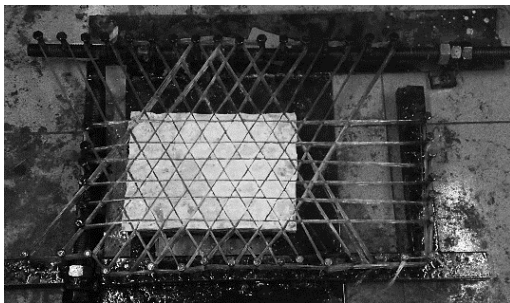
Fixtures for tensioning fibers after placement in the rubber mold
